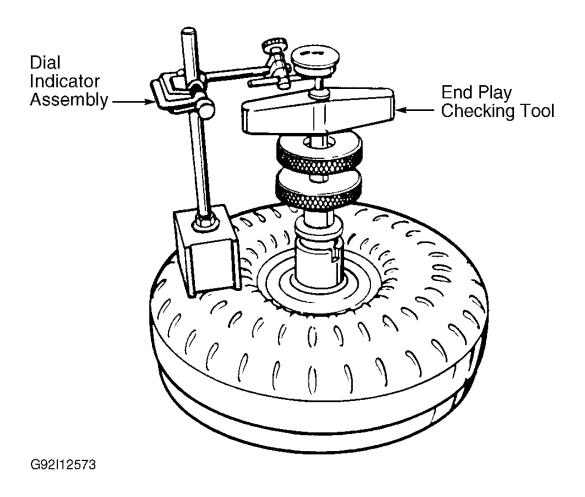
Checking Torque Converter End Play Courtesy of GENERAL MOTORS CORP.
